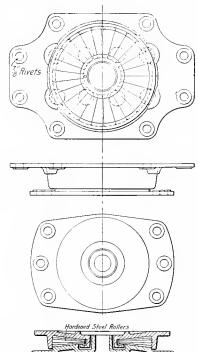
Barber Roller Bearing Center Plate. Standard Car Truck Company.
